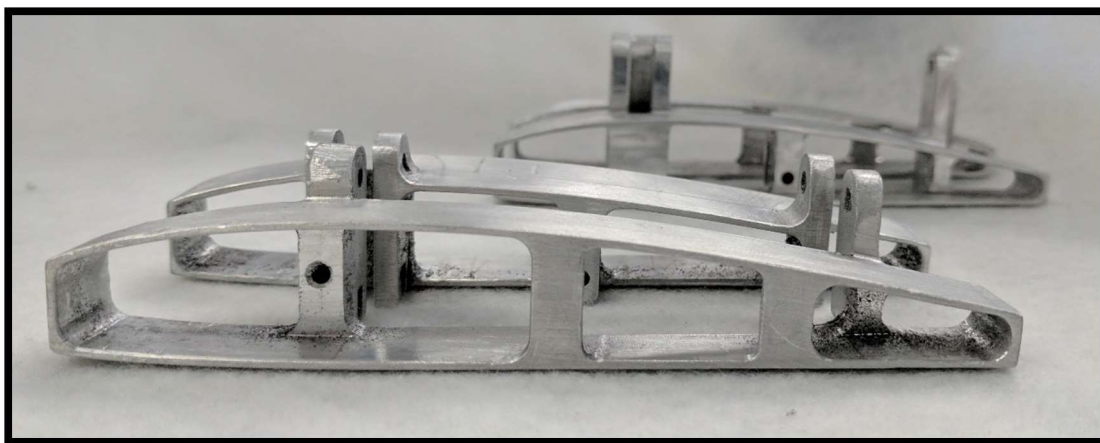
ALUMINUM WING JOINT PIECES UNASSEMBLED BUT OTHERWISE FINISHED
